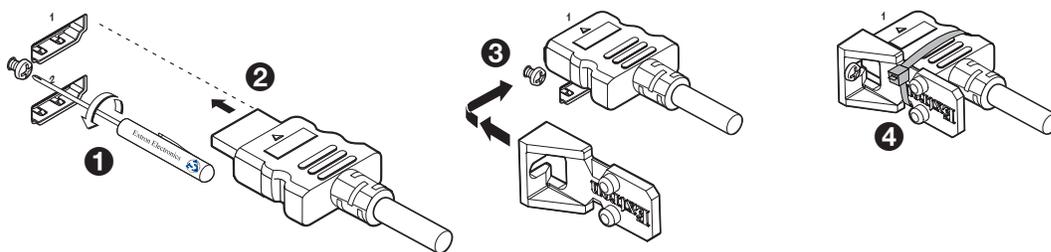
LockIt Cable Lacing Bracket Mounting Instructions
